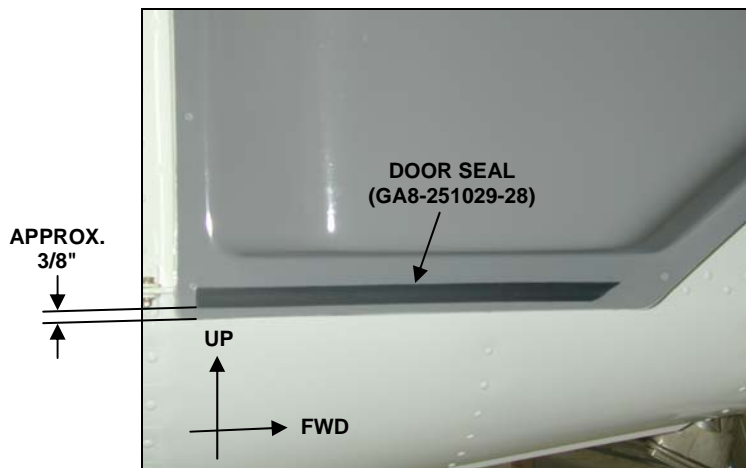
New seal installed on the inside of the door to mate with the seal installed on the outboard face of the sill in the door opening (right hand side shown).
